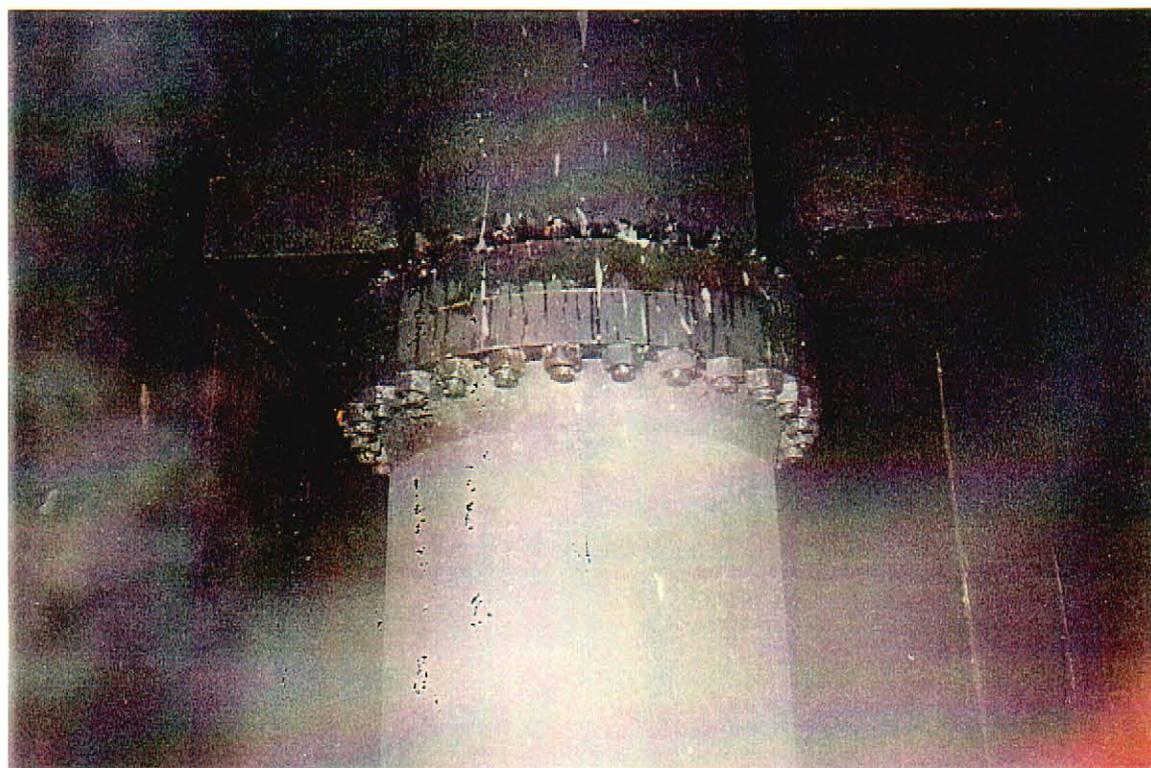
FLANGE CONNECTION ON WEST CYLINDER BARREL
